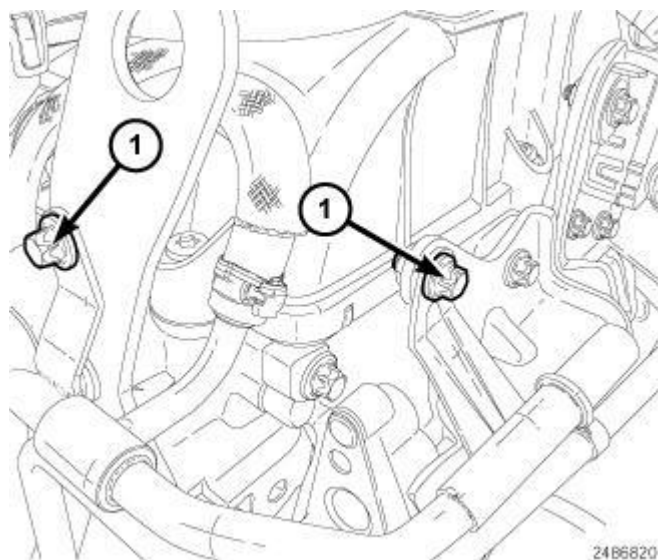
Bolt Securing CAC Tube To Glow Plug Module
